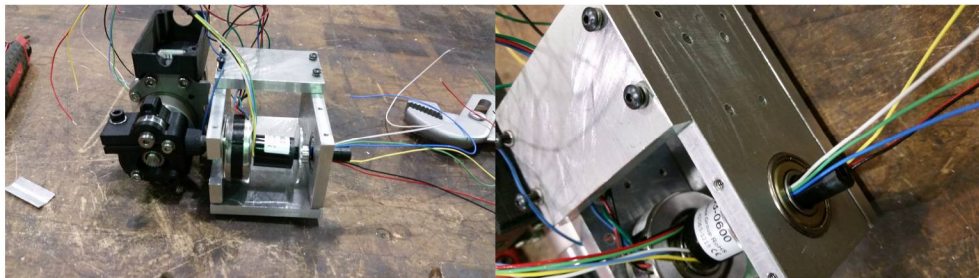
,2: (Left) New mount design. (Right) Close up of PEEK adapter + wire passthru
